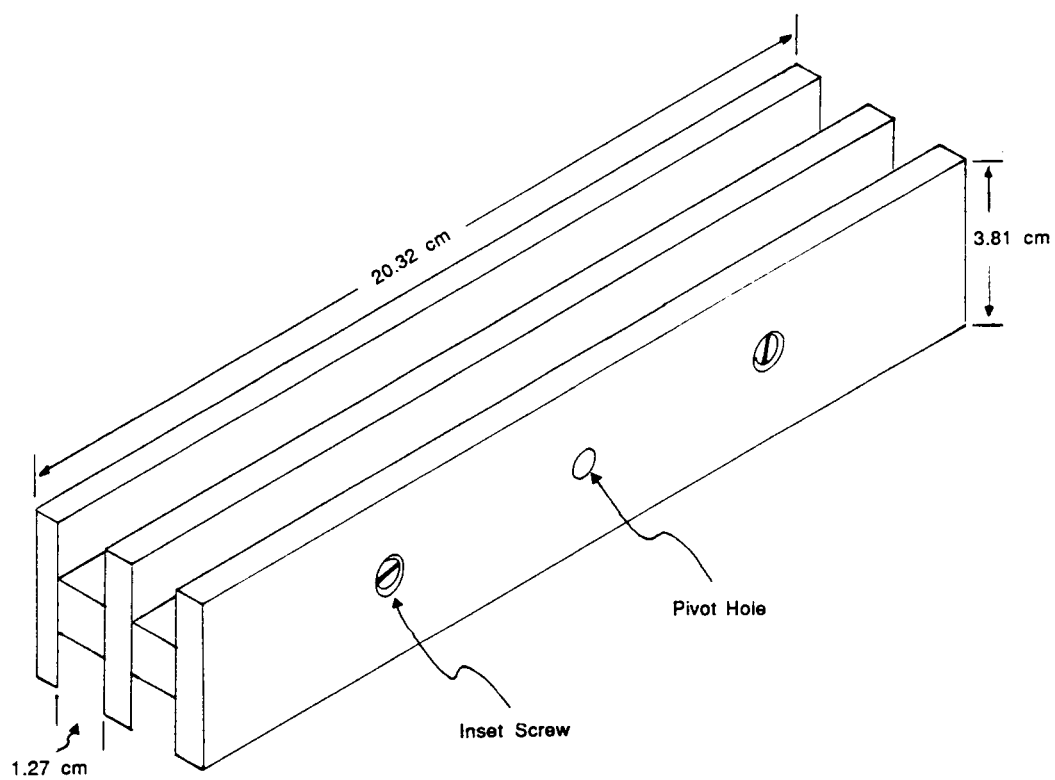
Mold Section Used to Form Composite Specimens from Flexible Prepreg
